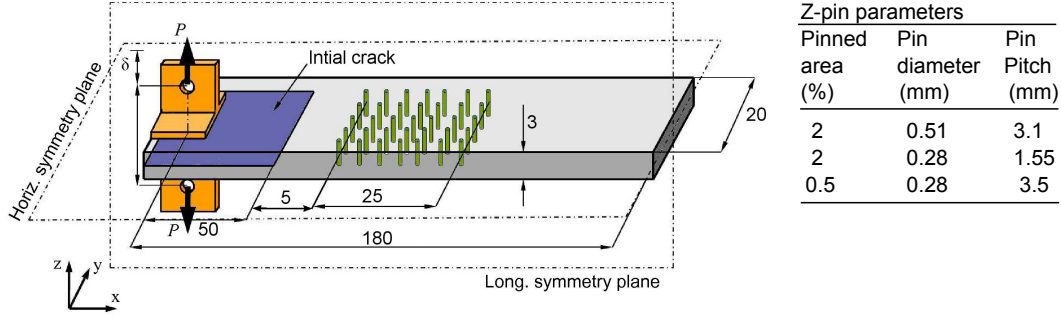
Geometry and dimension of the z-pinned DCB test specimen (unit: mm).
